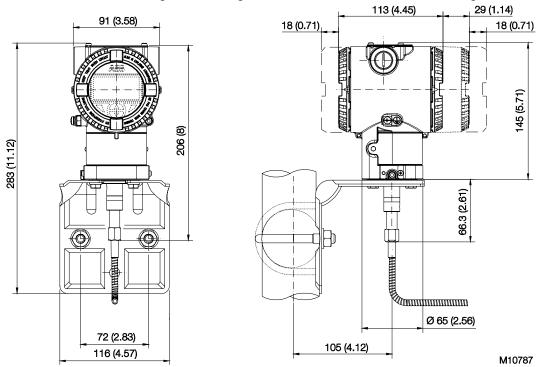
Dimensions - Barrel housing with mounting bracket for vertical or horizontal mounting on 60 mm (2 in.) pipe
